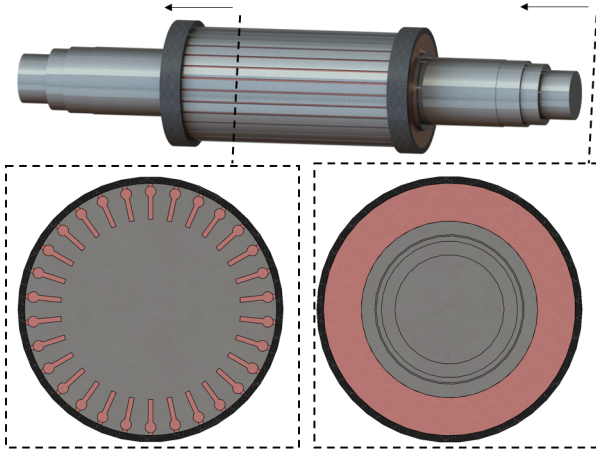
Sketch of squirrel cage slitted solid rotor. On the left is the section view of the active part and on the right is the view from the end of the rotor.
